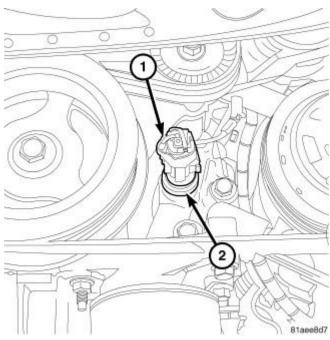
OIL PRESSURE SWITCH Courtesy of CHRYSLER LLC
